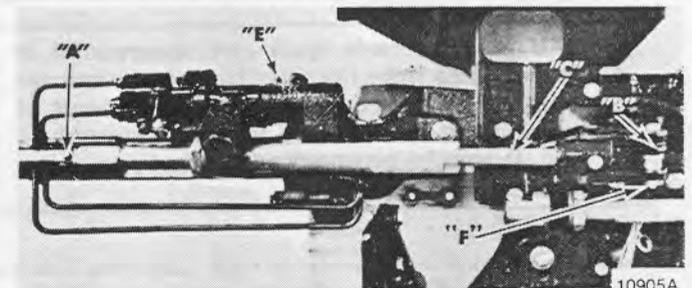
Lubrication Points Inside Boat (In-Line with Power Steering)
